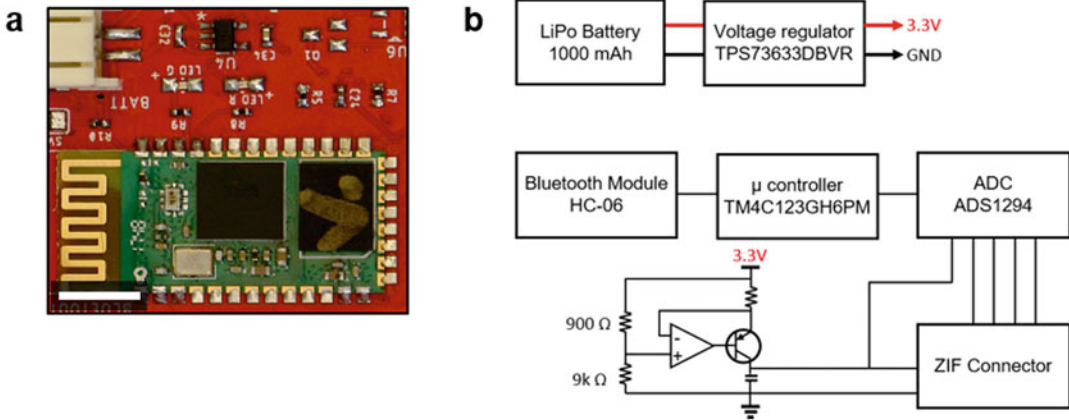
(a) Optical image and (b) circuit diagram of the unpackaged printed circuit board with integrated components of the portable wireless unit. Scale bar is 5 mm
